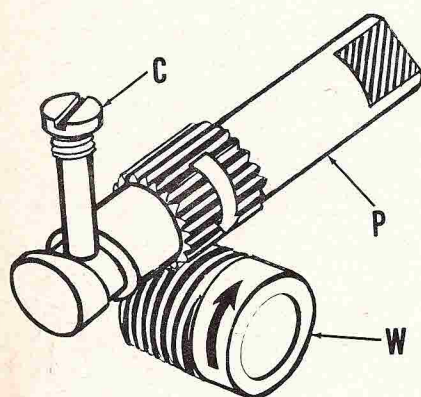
View showing manual chain oiler pump installed on model XL-700. Refer to Fig. HL80 for exploded view.
